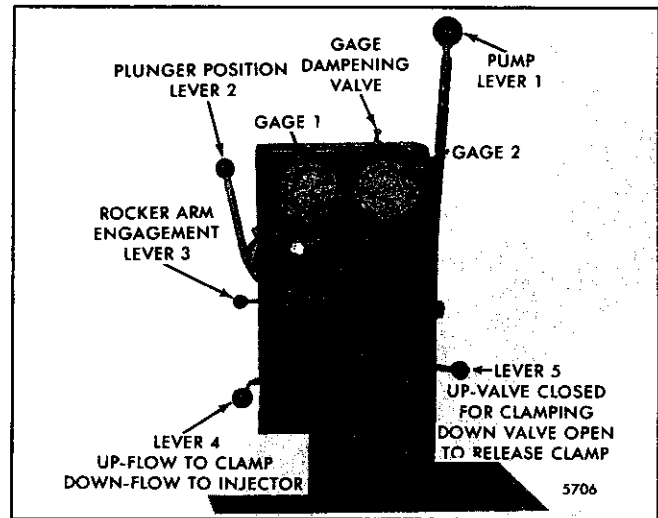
Injector in Position for Testing with Tester J 23010-A
